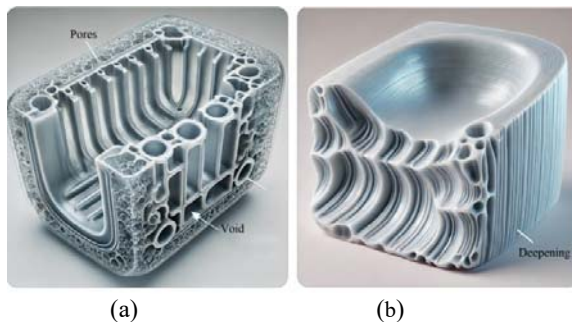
Examples of parts with shrinkage: (a) internal shrinkage; (b) surface shrinkage
